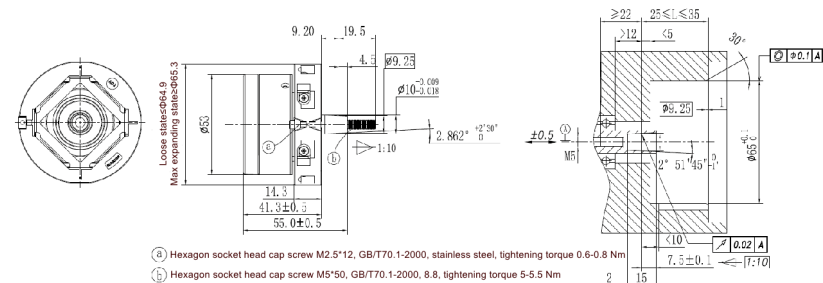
Mounting dimensions      Figure 3-2 Recommended traction machine dimensions for the encoder
